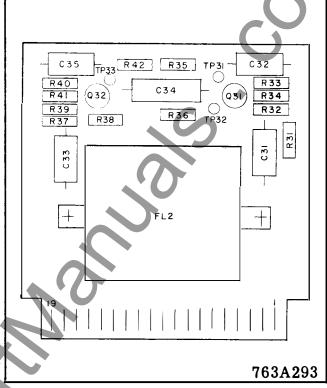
Component locations on the I.F. amplifier printed circuit board - germanium version.
